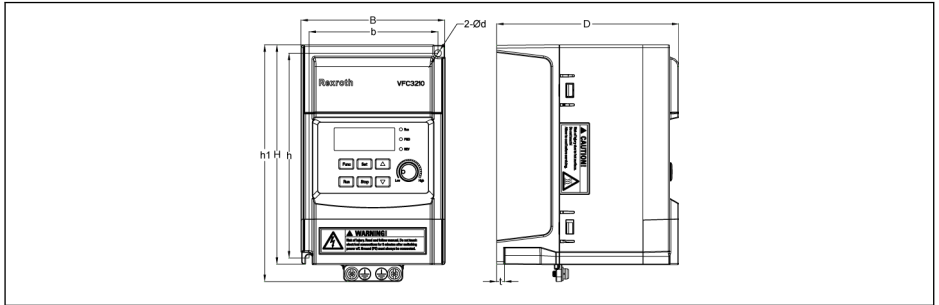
VFC 3210 0K40...1K50 dimensions figure
